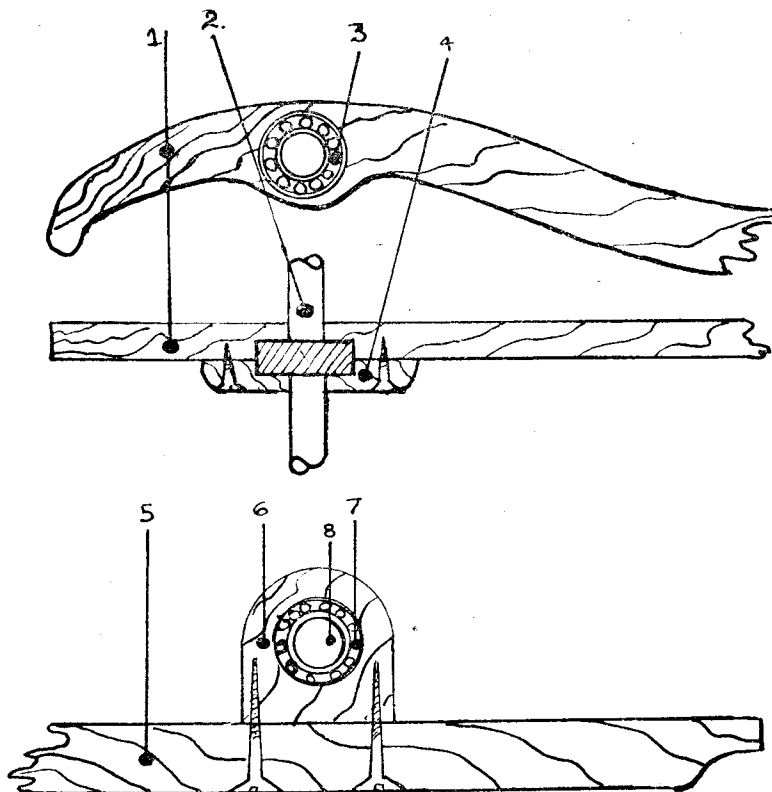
Front and rear axle bearings. 1, Front end chassis; 2, Front axle; 3, Ball-race; 4, Cover plate; 5, Rear end chassis; 6, Ball-race housing; 7, Ball-race; 8, Rear axle
